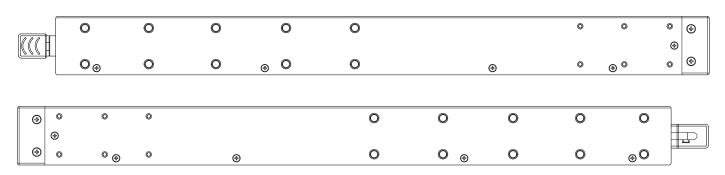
Side Panels of SNX-60x0-486F Series Switch
